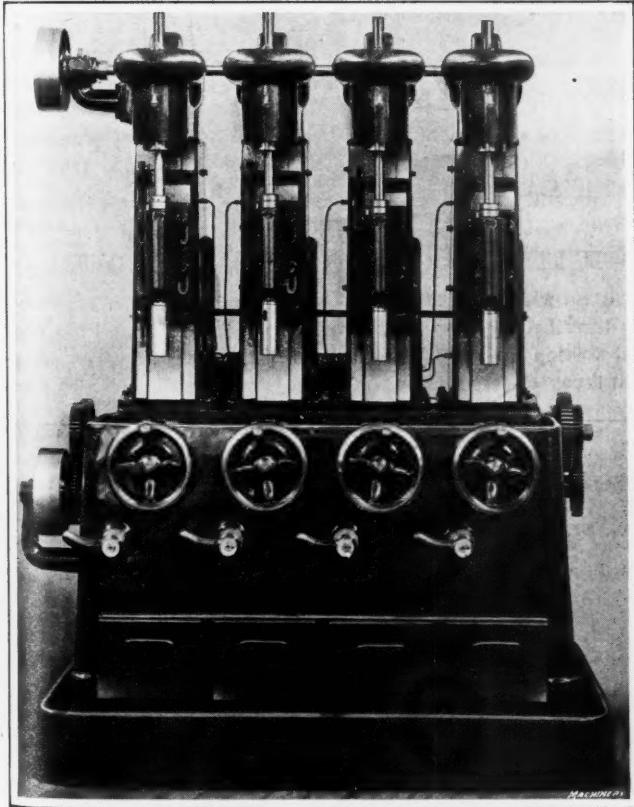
Four-spindle Reed-Prentice Brass Drilling Machine
